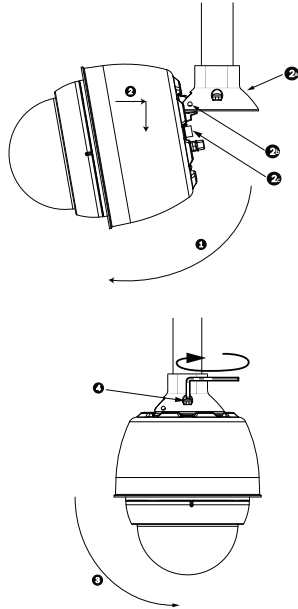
Pendant to Roof / Pipe Mount Attachment
